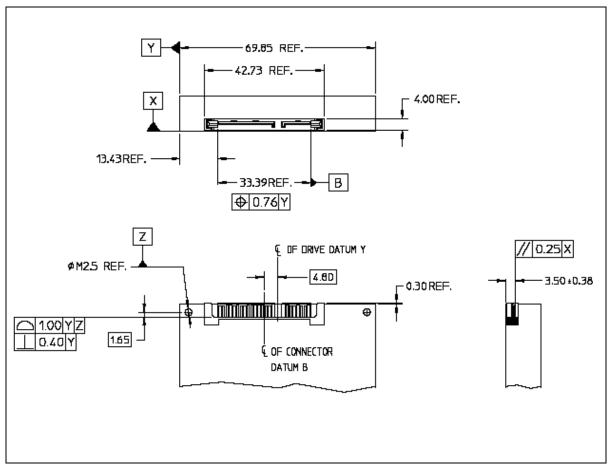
Device plug connector location on 1.8 inch bottom mounted device
